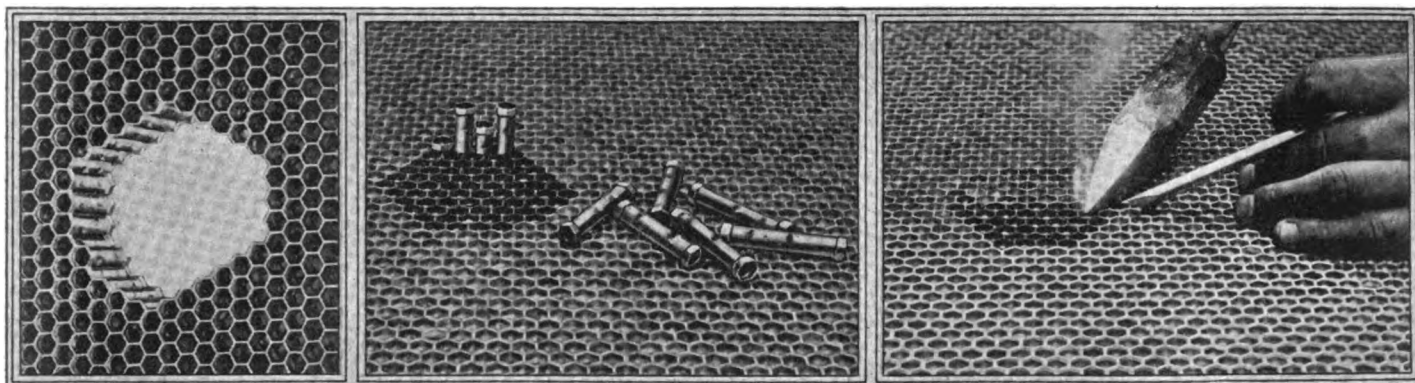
Steps in the repair operation. At the left part of core with damaged tubes removed. Center—New tubes inserted. Right—New tubes being soldered in place
